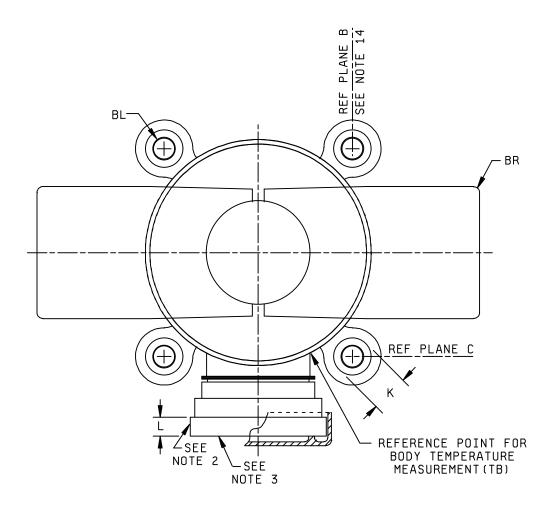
A. Alternate outline drawing of electron tube type DOD-042 (top view).
